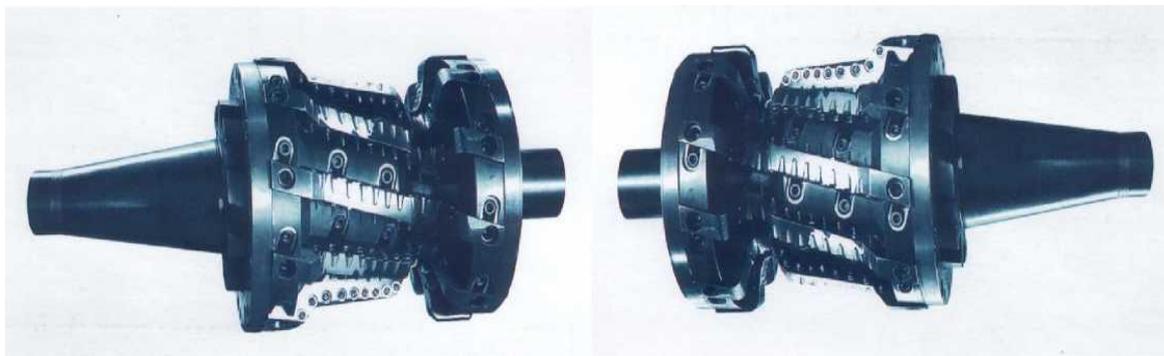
Set of mills for installation on the machine mod. KZh-20TF1
